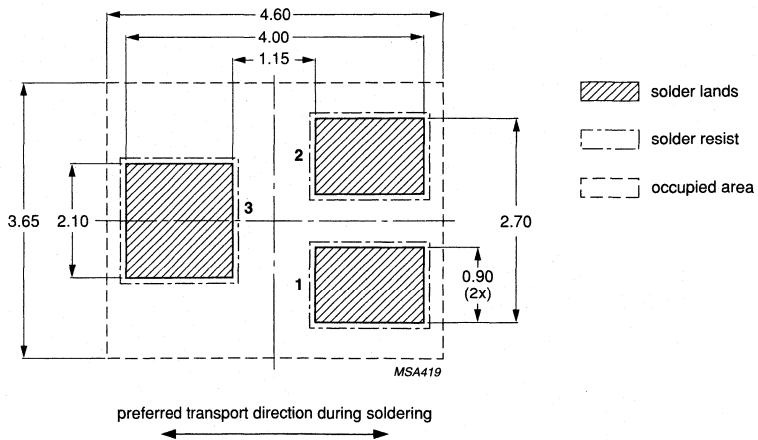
Wave soldering footprint for SC-70 (SOT323).
